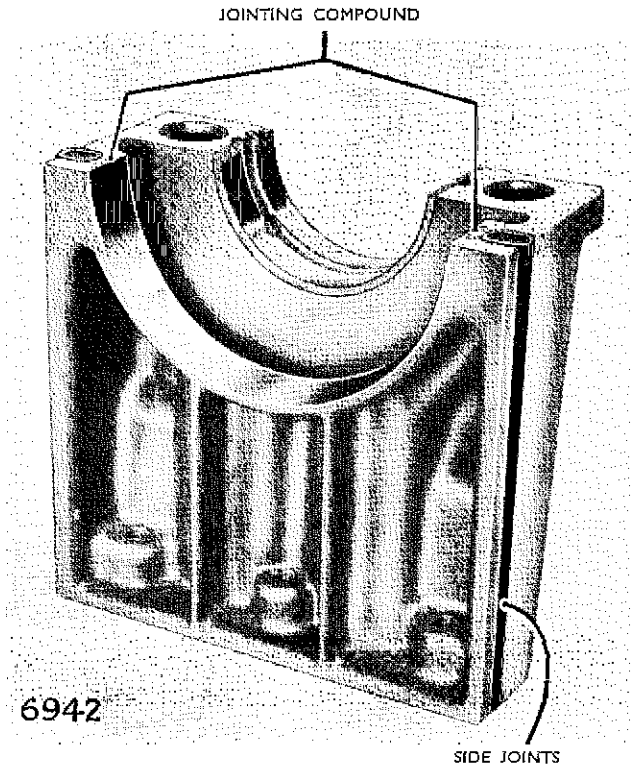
Rear main bearing cap oil seats and position to sparingly apply jointing compound
